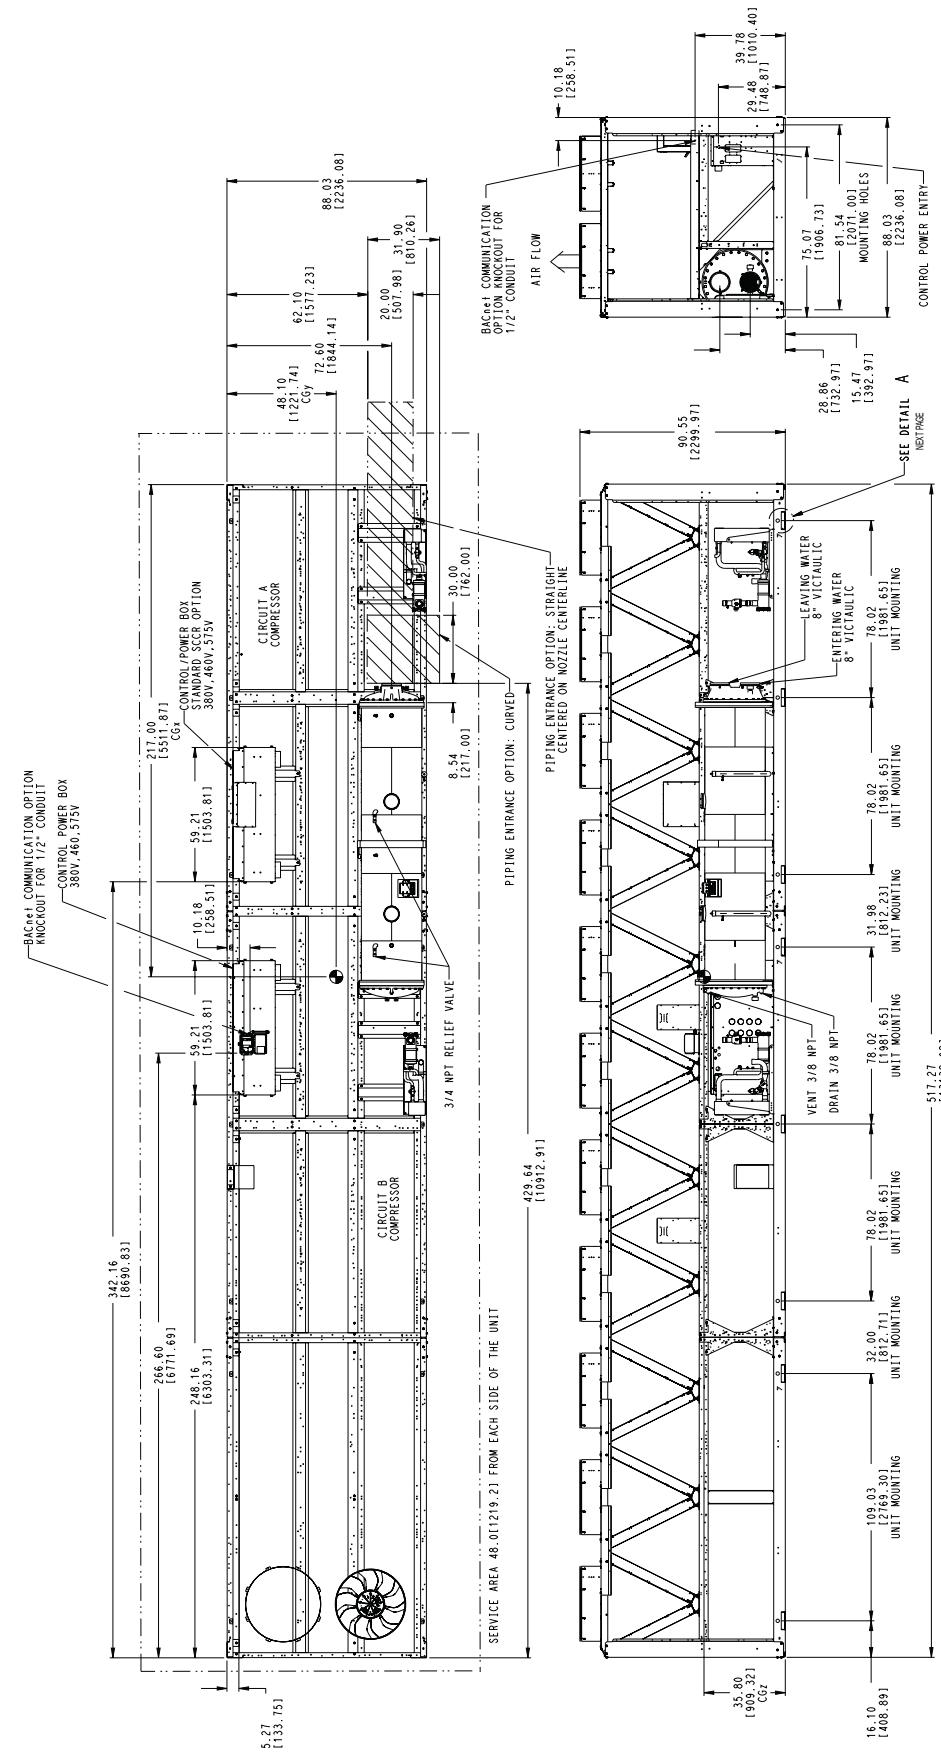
30XA476 Air-Cooled Liquid Chiller Dimensions
